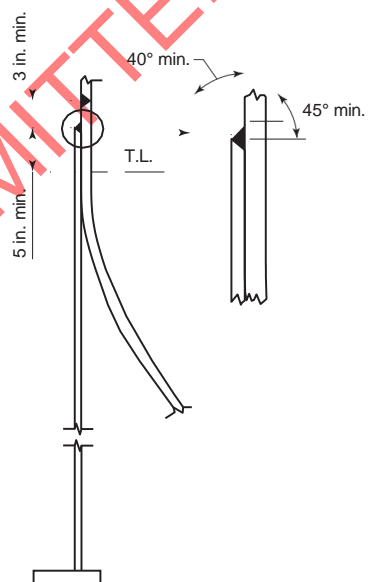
Skirt-to-Shell Attachment Weld is Moved Up On the Shell From the Tangent Line to Remove the Weld From the High Stress Area
